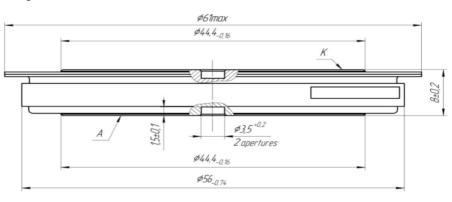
Dimensions of D053-7100 welding diode in ceramic housing.
